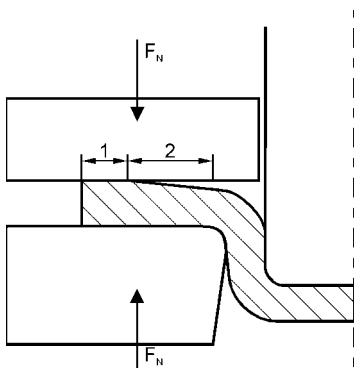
Tribological conditions in the flange area when deep drawing without lubricant or using solid lubricant. 1, flange area with holder contact; 2, flange area without holder contact.
